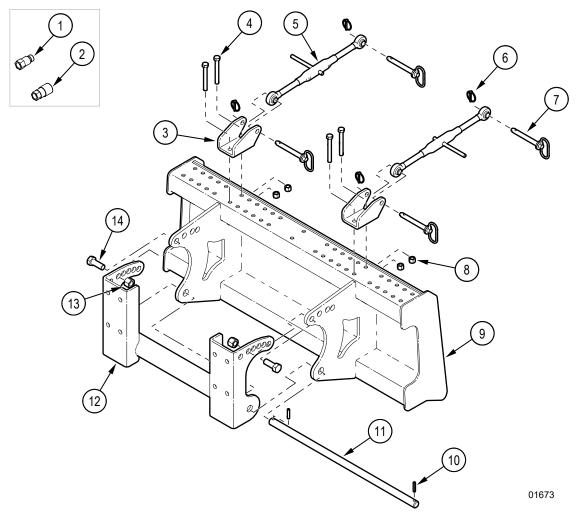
SQ500 Universal Quick-Attach Plate Parts
